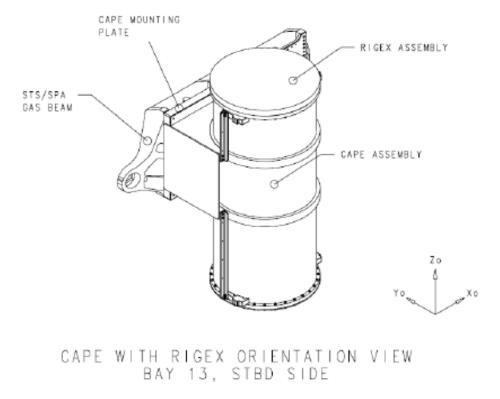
CAPE-RIGEX Assembly Mounted to Bay 13 SPA Beam (Figure by Boeing)
